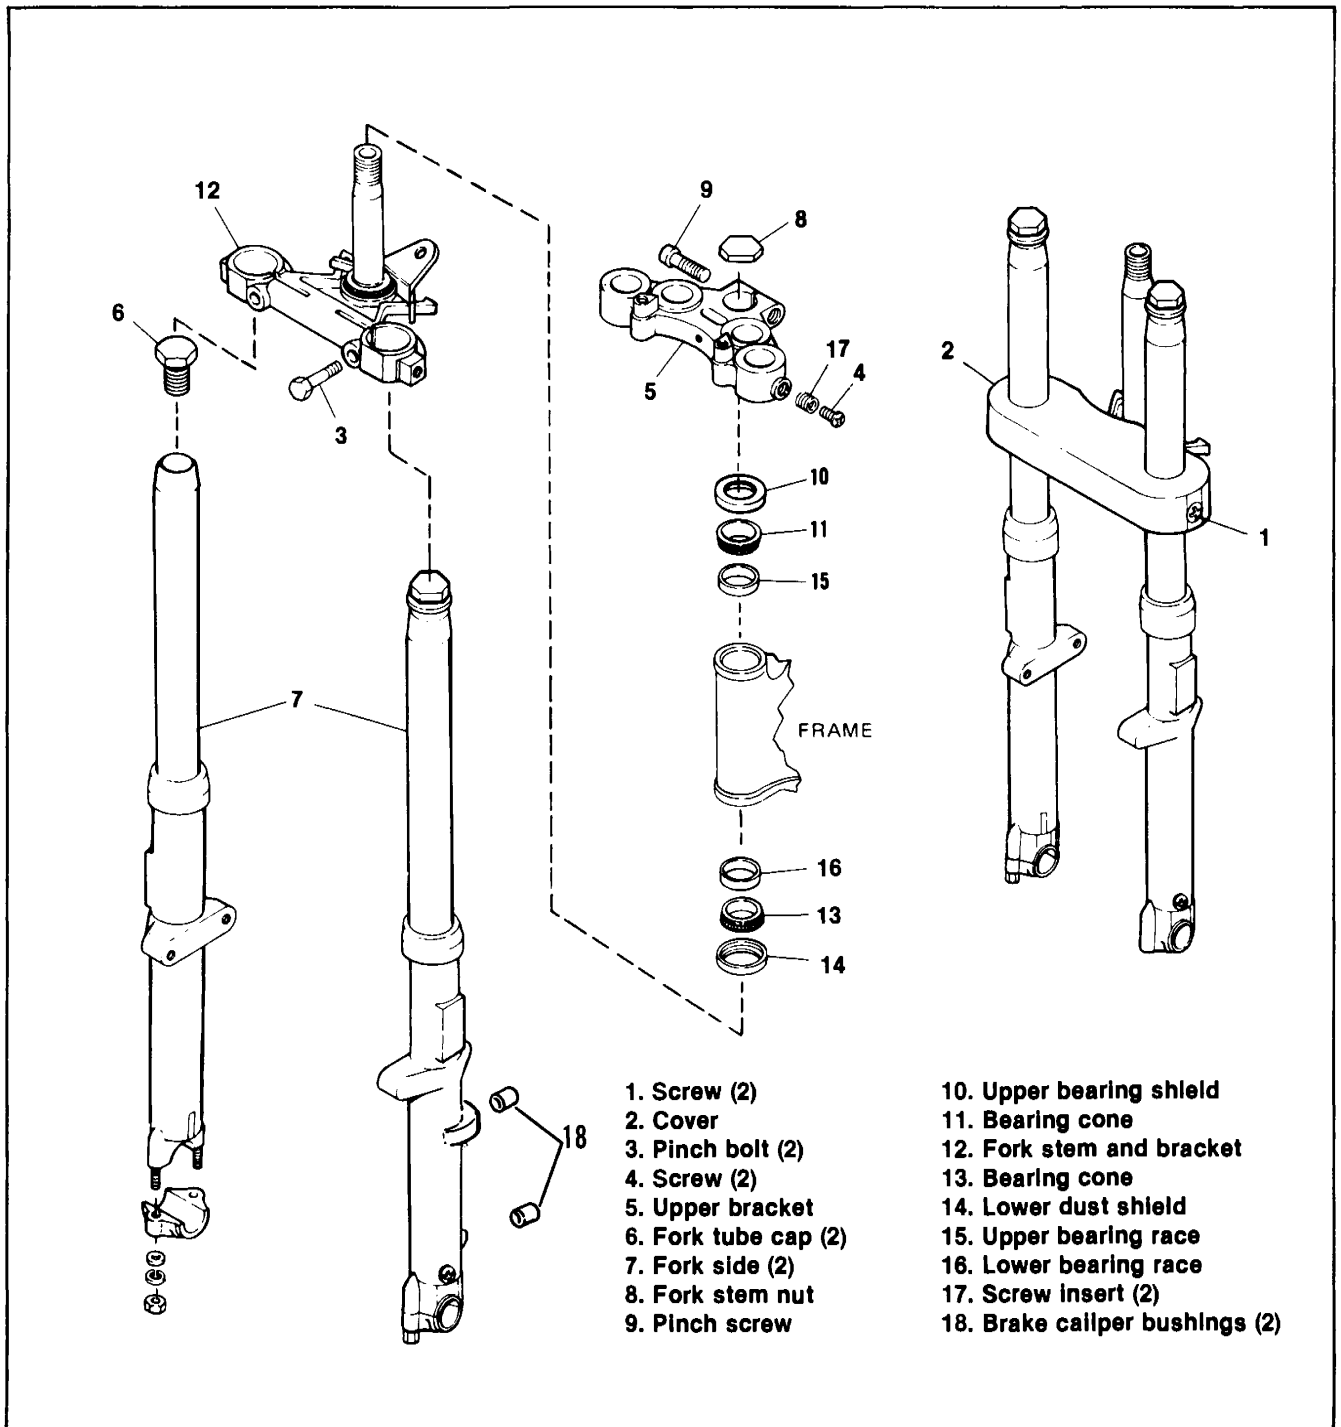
Front Fork Assembly — FXR, FXRS — 1984-1987
